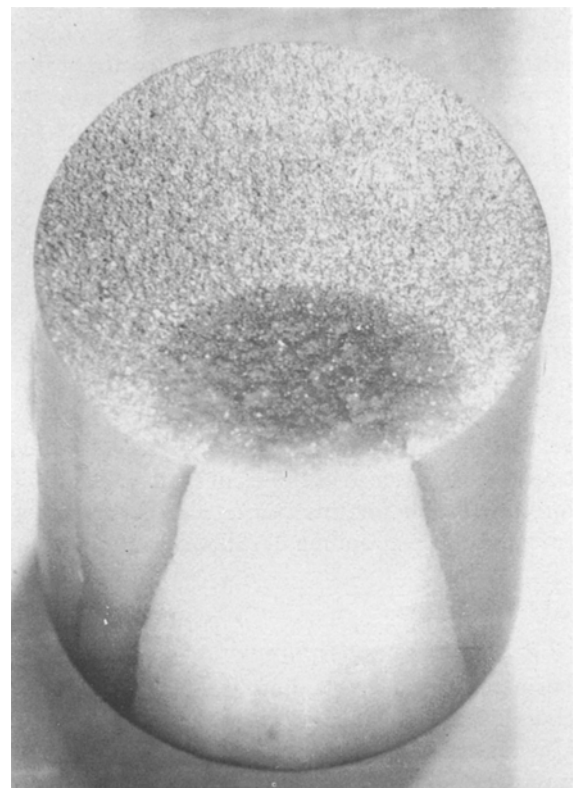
A severely stress-whitened specimen with a large sub-critical zone (105 °C, 40% and  $t_f = 9.17 \times 10^4$  s) showing the extension of the latter zone on the fracture surface beyond the underlying debonded volume. The fracture surface is gold-coated to highlight the sub-critical zone.
